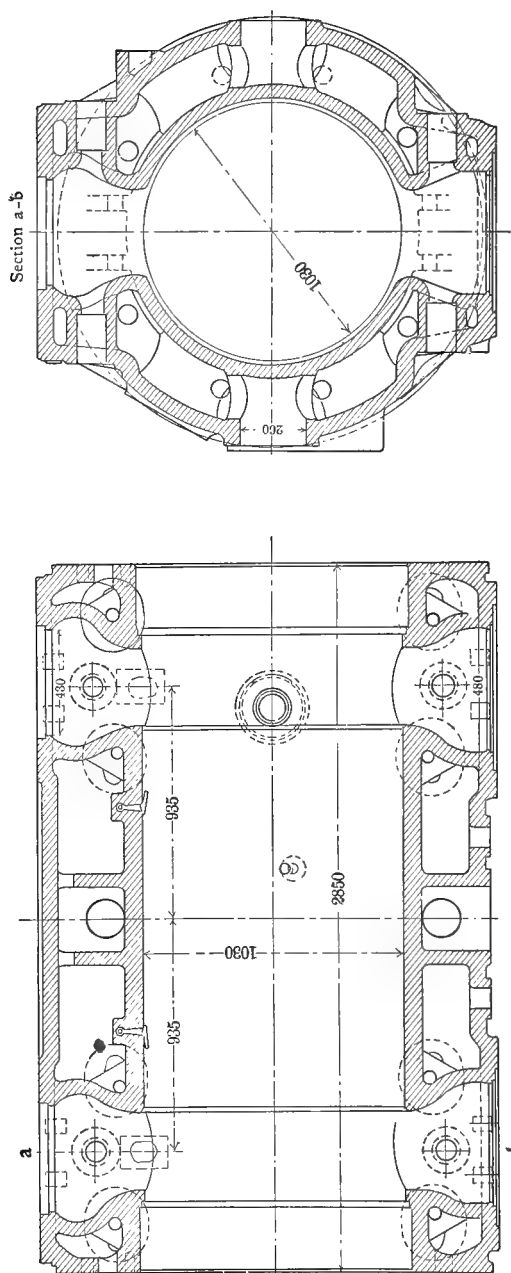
Cylinder of Double-Acting Gas Engine (Nürnberg Patent).
